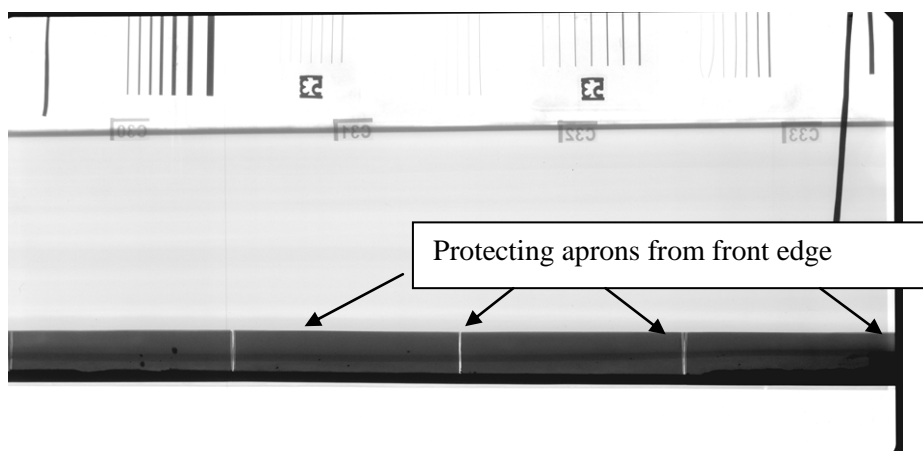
Front Edge of the Ka-26 Helicopter Rotor Blade Revealed by XR.
